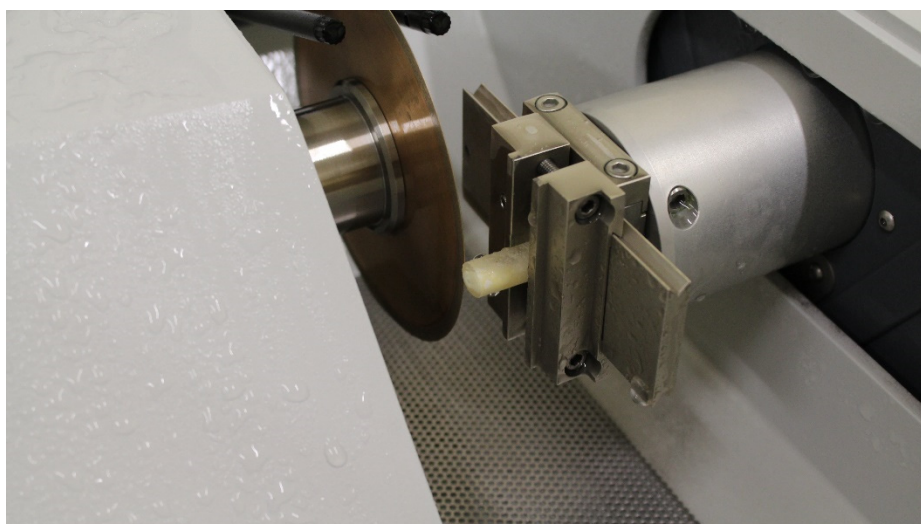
Sectioned perpendicular to the axial axis of the specimen with a precision cutting machine.
